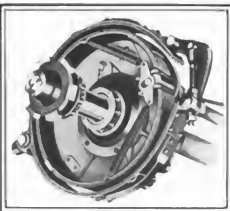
Brakes and axle spindle of Detroit package vehicle—note the Bower roller bearings and the driving splines of the floating axle
